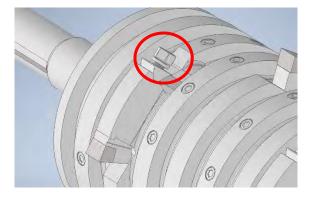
Fasteners Protecting End Threads of Tooth Shank
